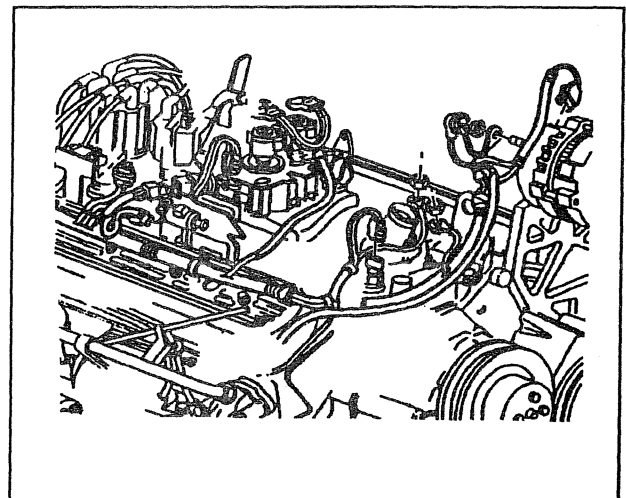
Engine Wiring Views - Top (5.0L - 5.7L)
